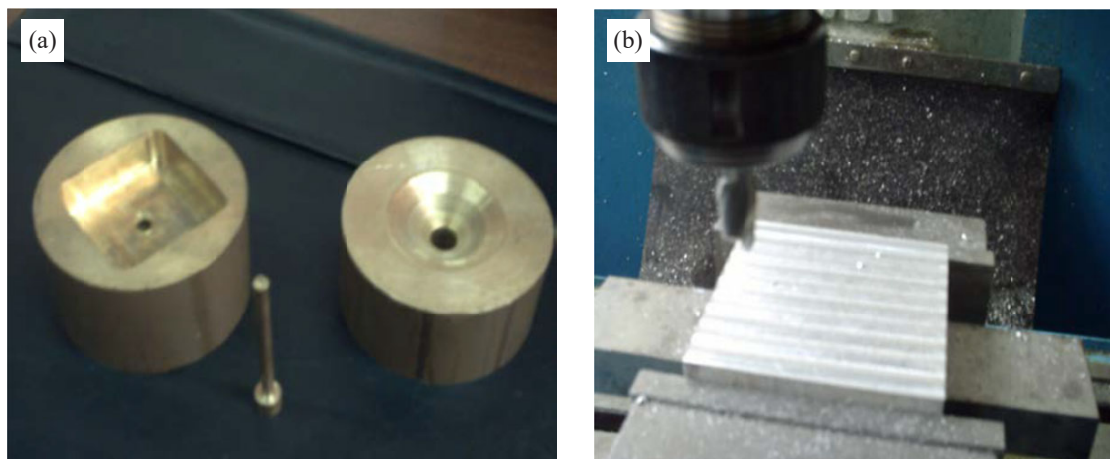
a) Brass mold used to produce the casted work piece b) Machining process
